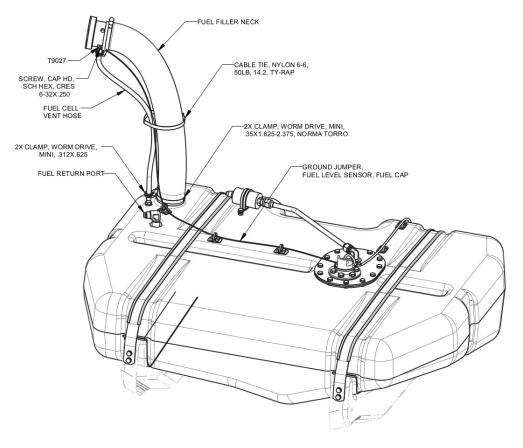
FUEL FILLER NECK INSTALL AND ELECTRICAL CONNECTIONS
